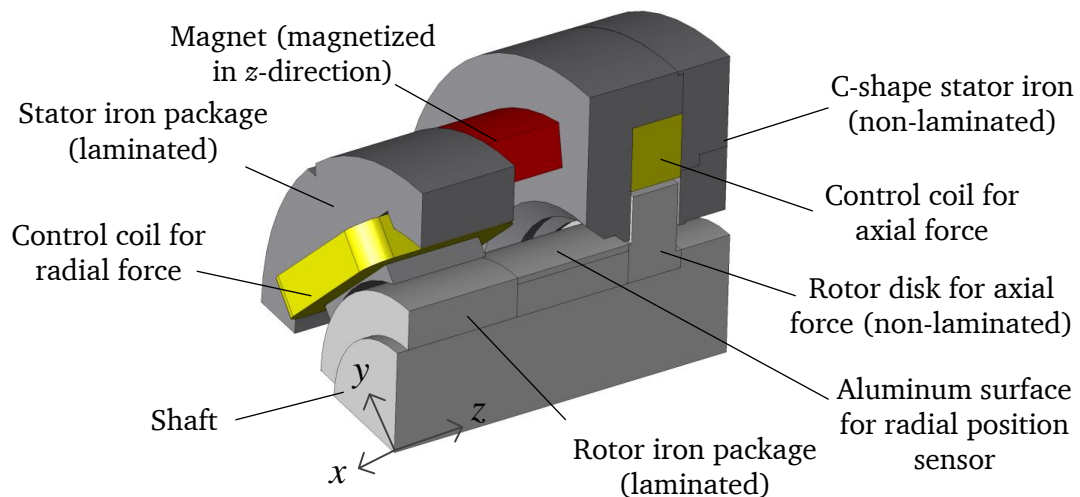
3D model of the combined magnetic bearing, built in *JMAG
